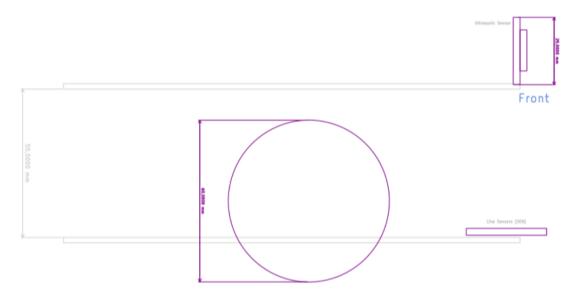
Right-side view layout to indicate orientation of ultrasonic sensor
